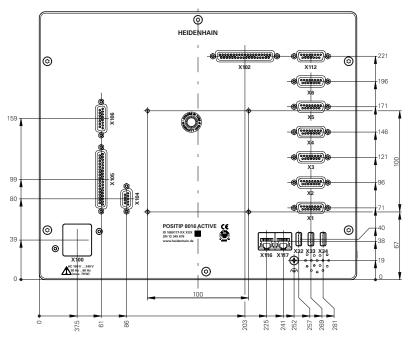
Dimensions of the rear panel for devices with ID 1089177-xx
